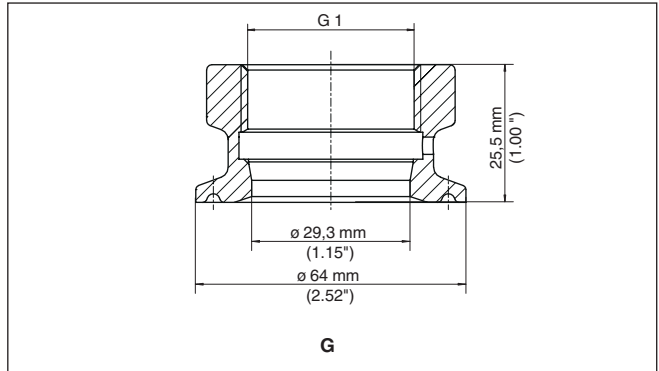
Dimensions of threaded adapter G1 (DIN 3852-X) on Clamp 2" (DIN 32676, ISO 2852) PN 16
